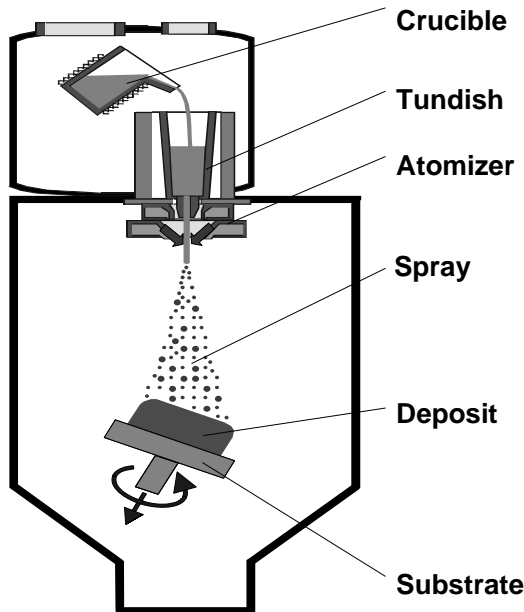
A schematic of the spray forming system (SK-2) at the Institute fuer Werkstofftechnik, University of Bremen, Germany
